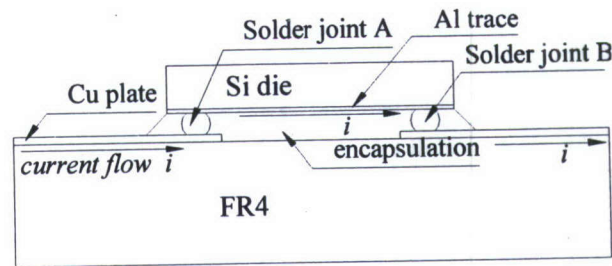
Flip Chip Solder Joints Test Structure(Ye Hua 2004)
